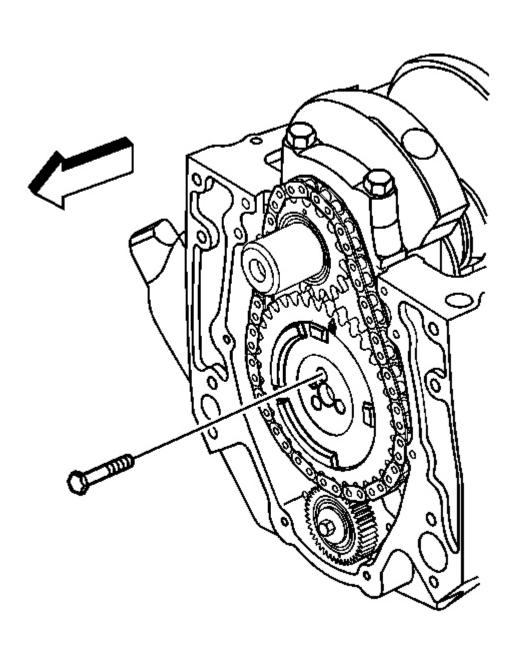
Checking Camshaft Timing Chain Free Play Courtesy of GENERAL MOTORS CORP.
